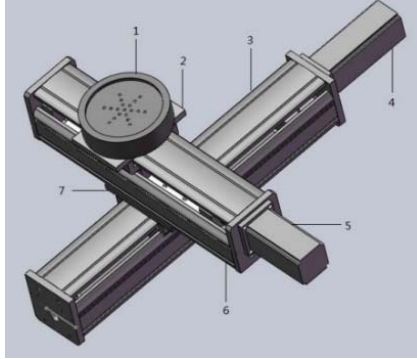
Dual-axes motion platform. 1. Wafer stage 2. Bracket 3. Y-axis ball screw pair 4. Y-axis servo motor 5. X-axis servo motor 6. X-axis ball screw pair 7. Bracket
